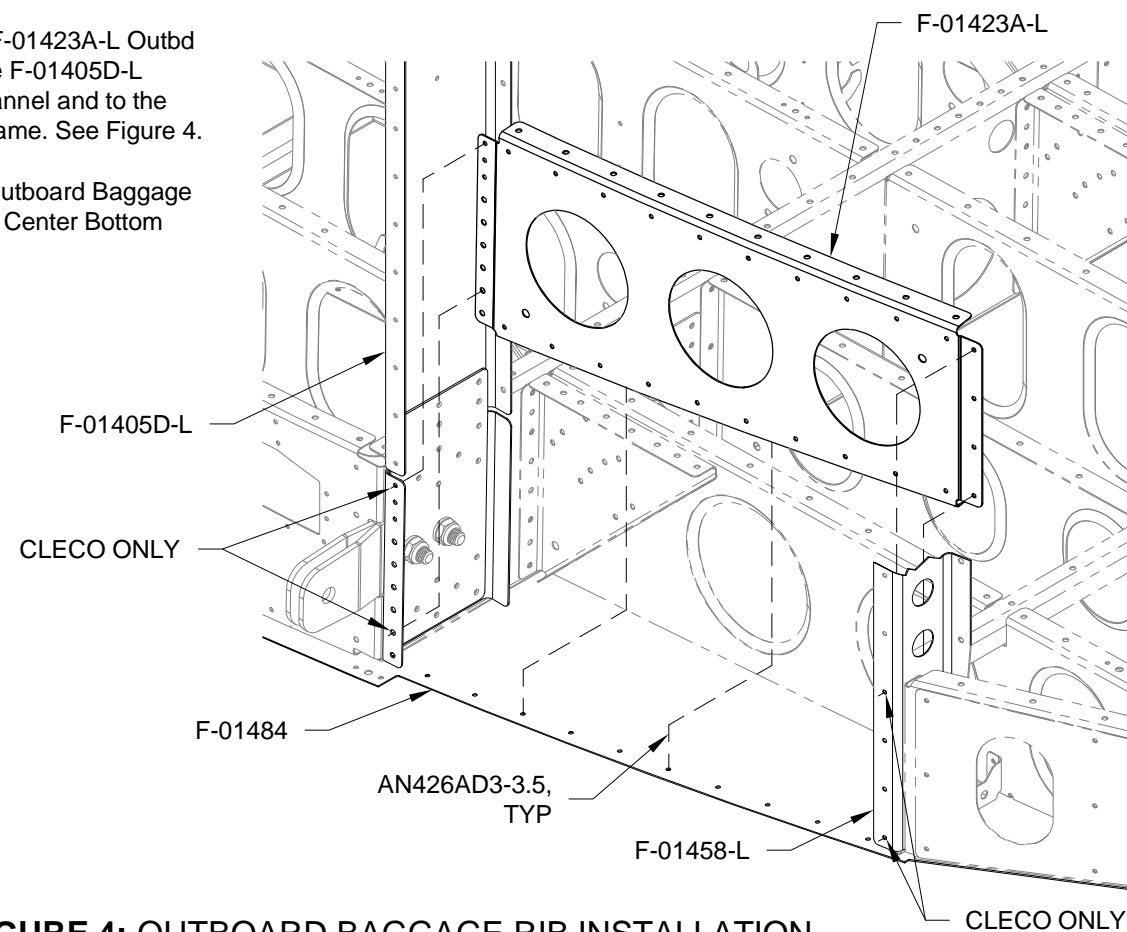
OUTBOARD BAGGAGE RIB INSTALLATION
